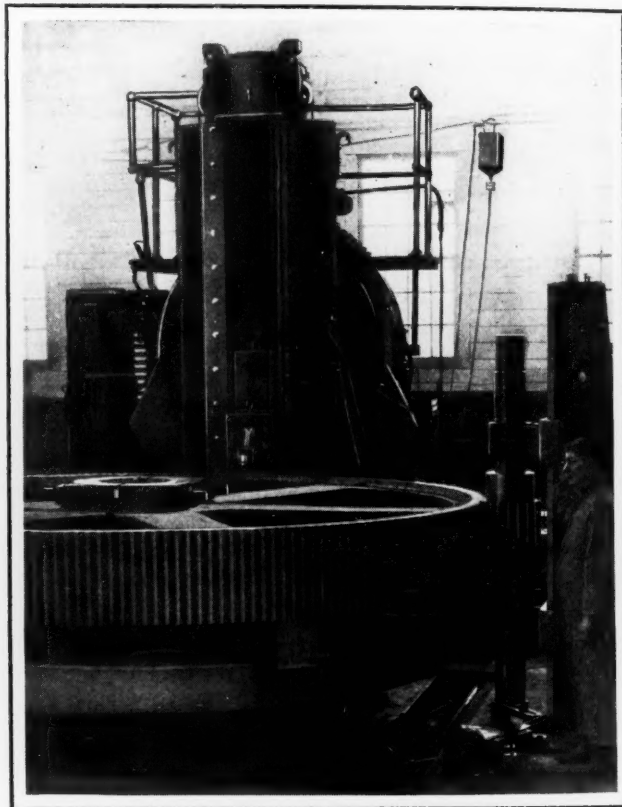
Gear-cutting Machine with Motor Drive for Ram and Indexing Mechanism
